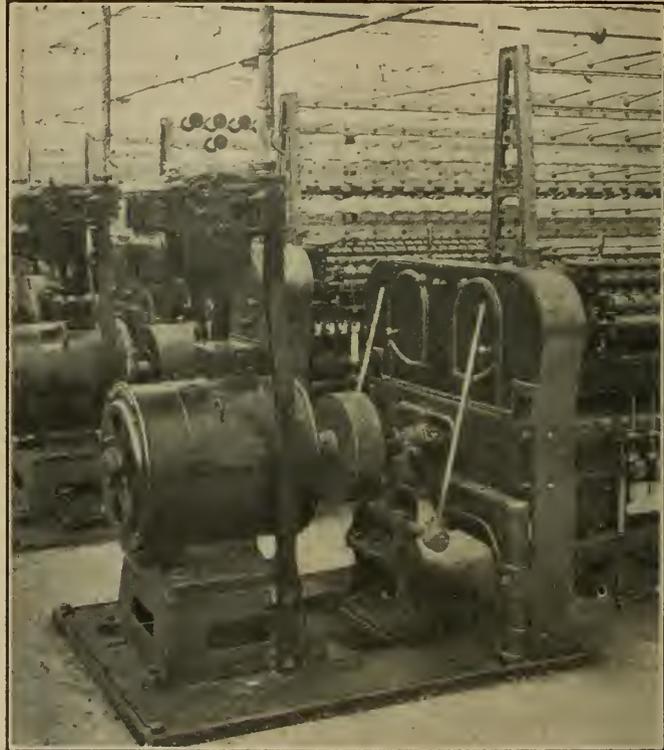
10 H.P. MOTOR DRIVING DOUBLING FRAME THROUGH CLUTCH COUPLING.
